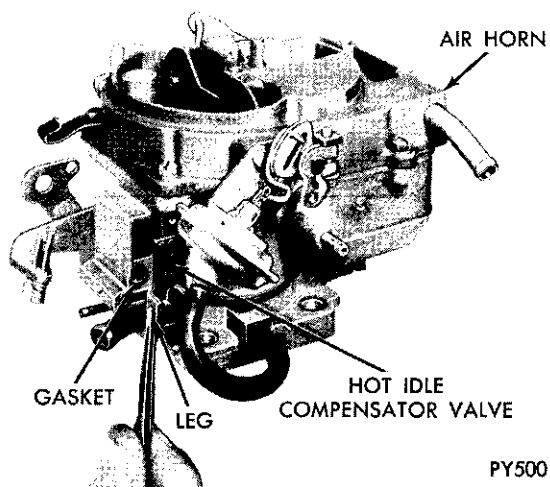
Removing or Installing Hot Idle Compensator Valve
